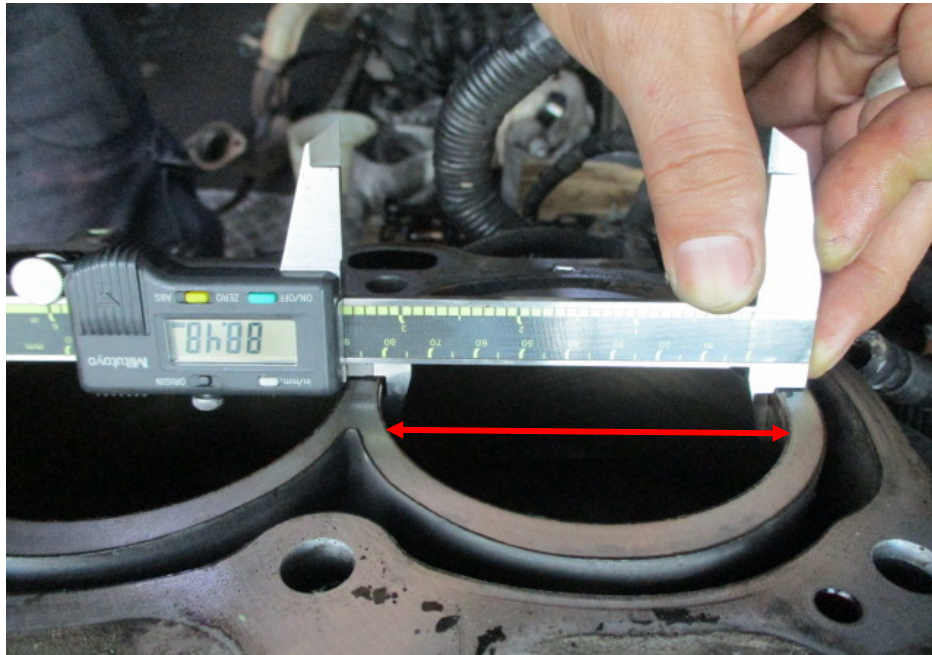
shows measurement of the stroke for cylinder 3 of the Toyota engine that I had inspected. The bore and stroke measurements of the Toyota engine were carried out using a digital Vernier Caliper that was calibrated before the start of measurements.
